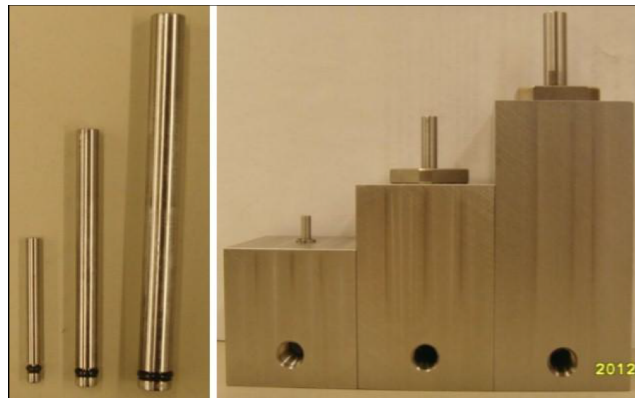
Pistons with O-ring seals and matching cylinder blocks
